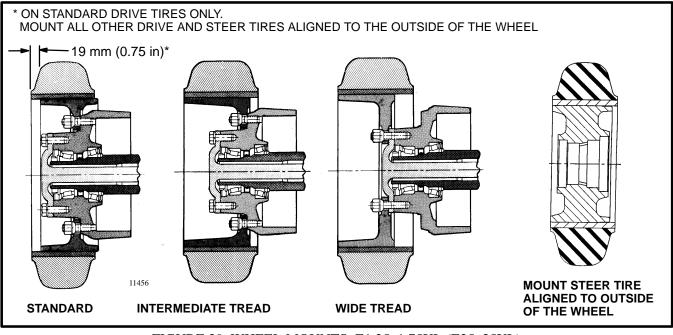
WHEEL MOUNTS, E1.25–1.75XL (E25–35XL)
